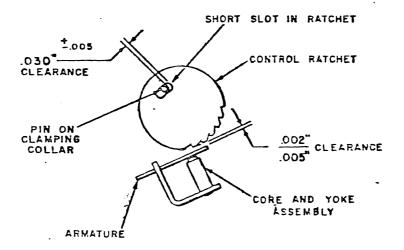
Paper Feed Clutch Coil and Yoke Assembly
